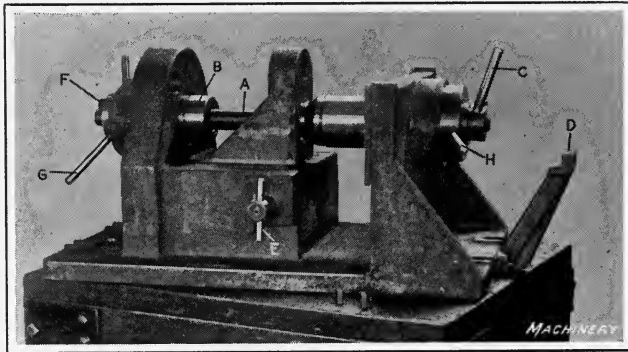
Work-holding Fixture for Drilling and Reaming Operations on Radial Drilling Machine
